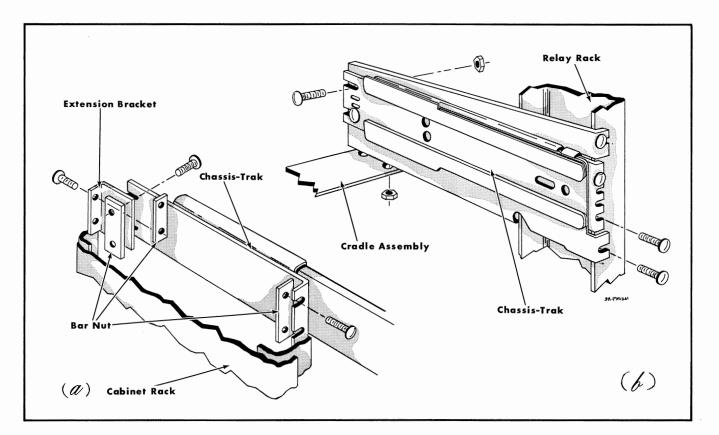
Mounting the Chassis-Trak slides.(a) The Chassis-Trak installed in an enclosed relay(b) The Chassis-Trak installed in an open relay rack.
